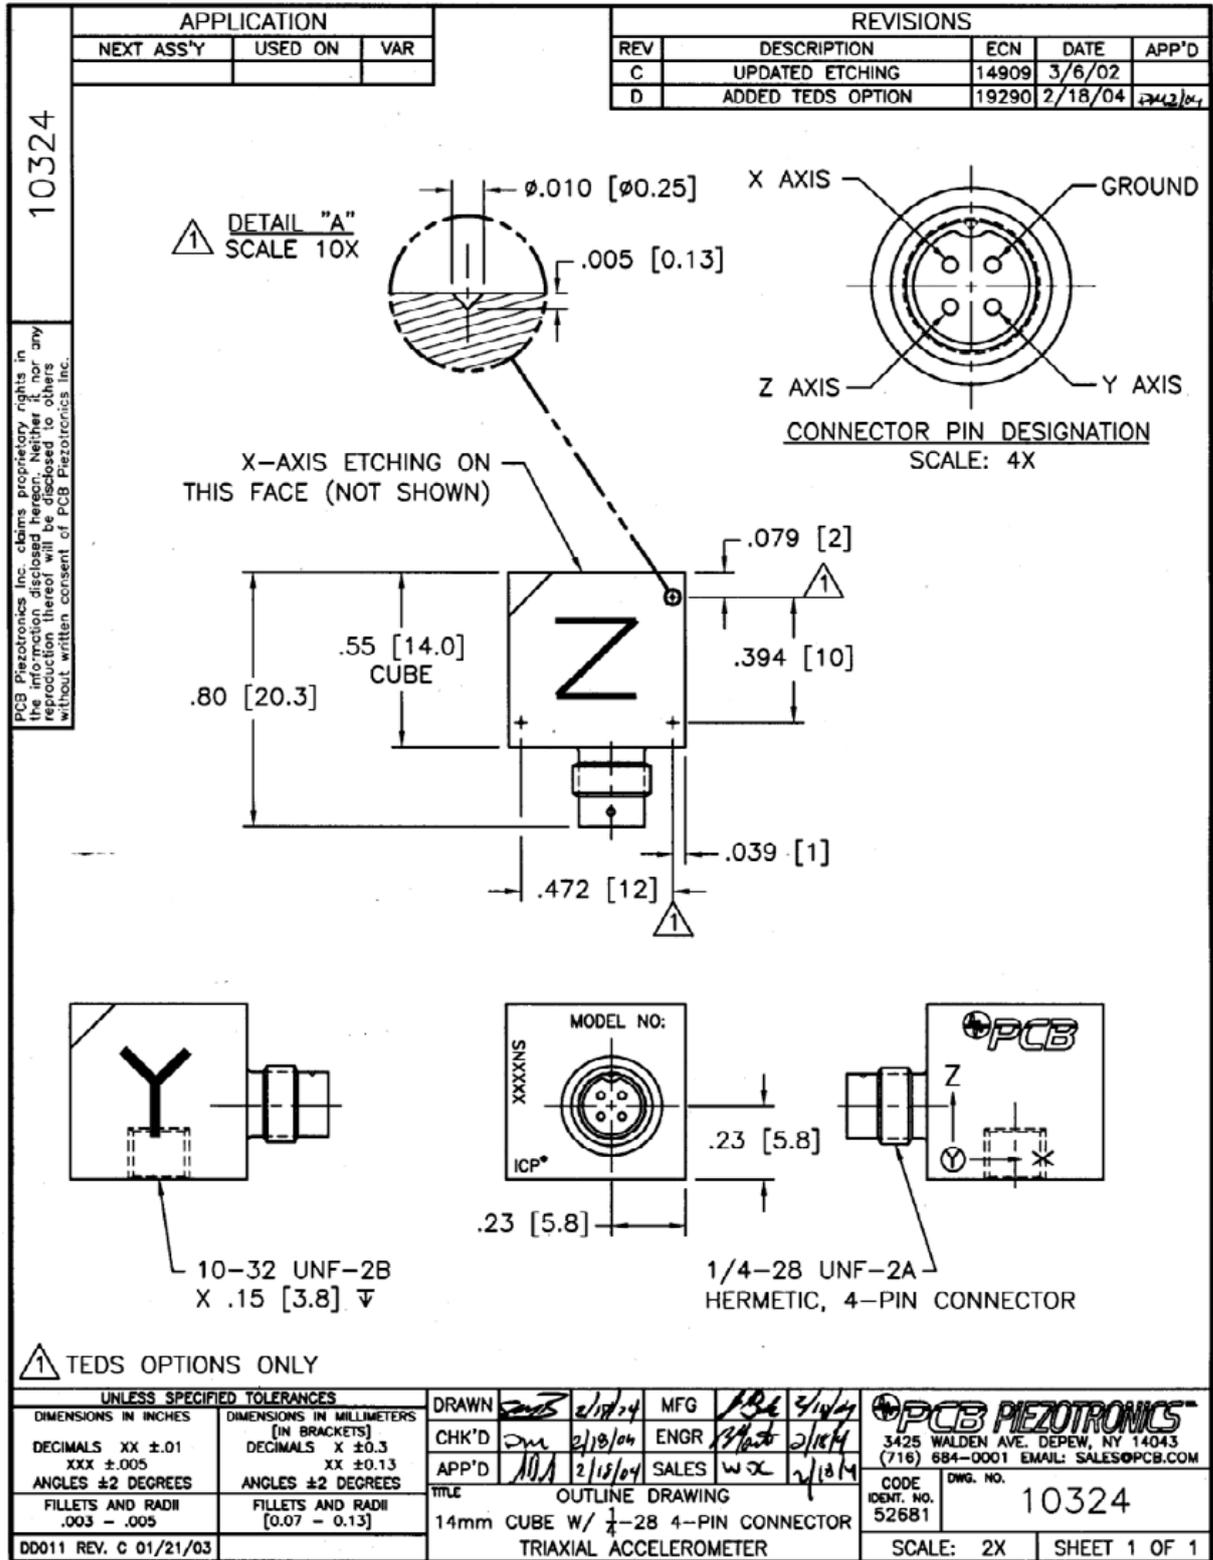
Mechanical drawings of triaxial accelerometers and related interfaces (Witworth BSF 3/16"×32 or M6x0.75 course shall be provided on the tested item for fixture if needed)
